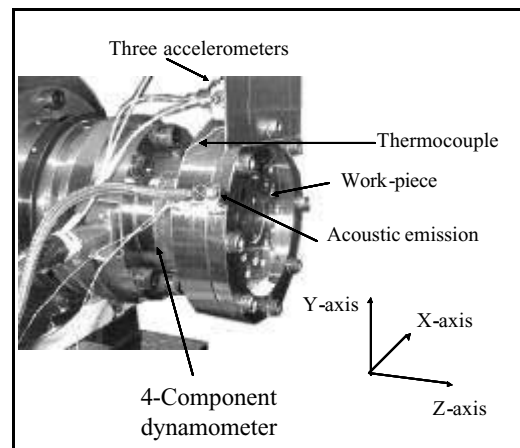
Sensors installed on the work-piece side of the machine tool.
